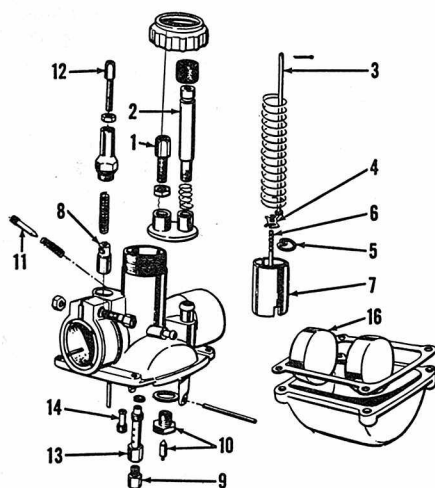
Exploded view of Mikuni carburetor used on all models.
